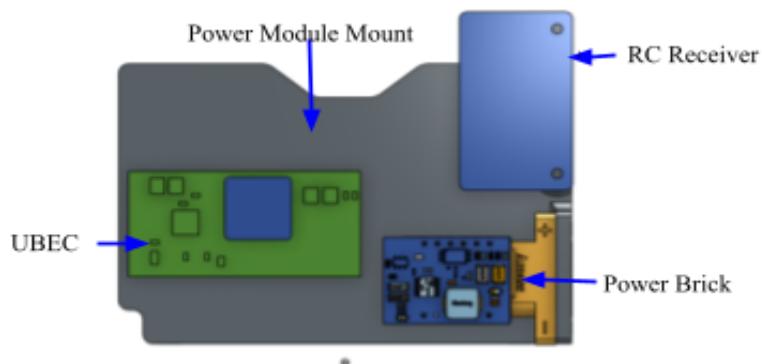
CAD View of the Placement of RC Receiver, Power brick and UBEC on the Power Module Mount
